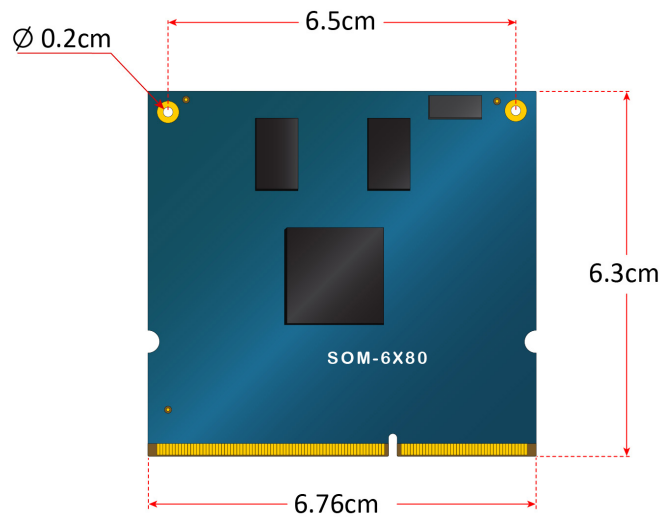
Dimensions of the VIA SOM-6X80 module (top view)
